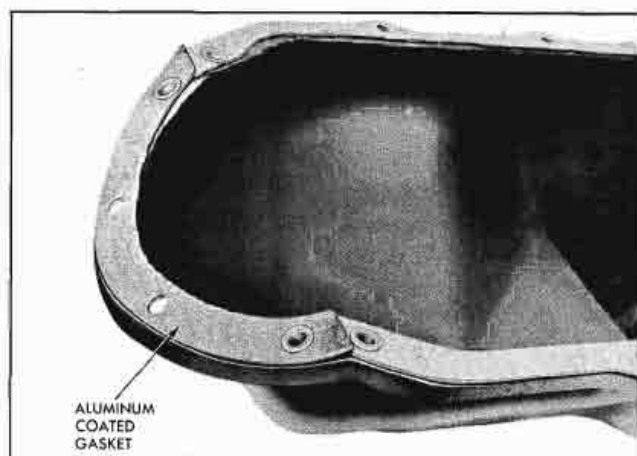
Front Oil Pan Gasket Overlapping Side Gaskets
